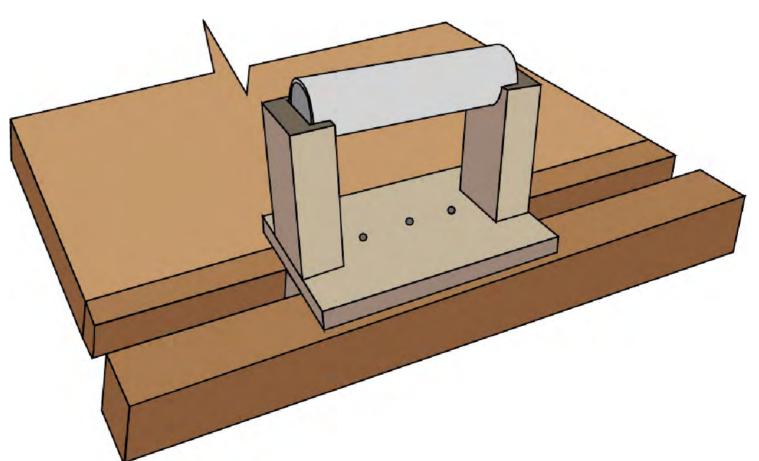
Adjust the size of this anvil to suit the Shaker box you're making.
